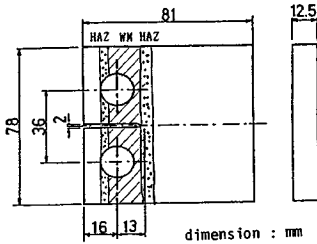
Specimen with weld perpendicular to cracking.
